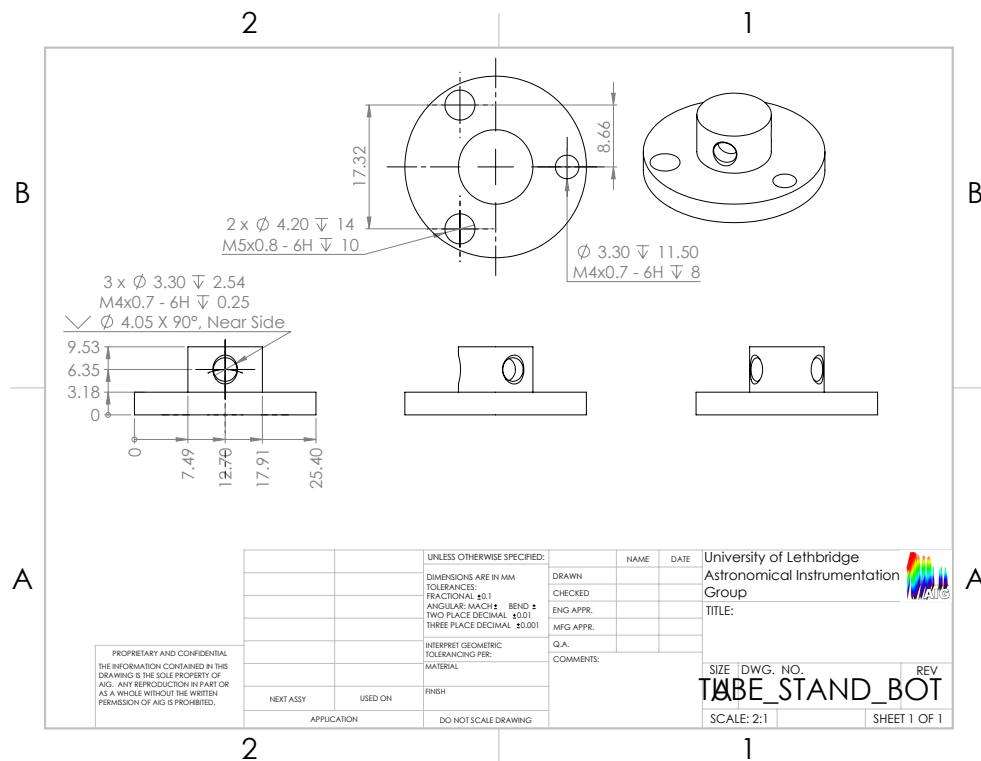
The strut foot for bolting to the top face of the CTIC. Three holes for attaching to the face may be tapped or threaded, and the three central holes must be threaded for attaching the strut.
